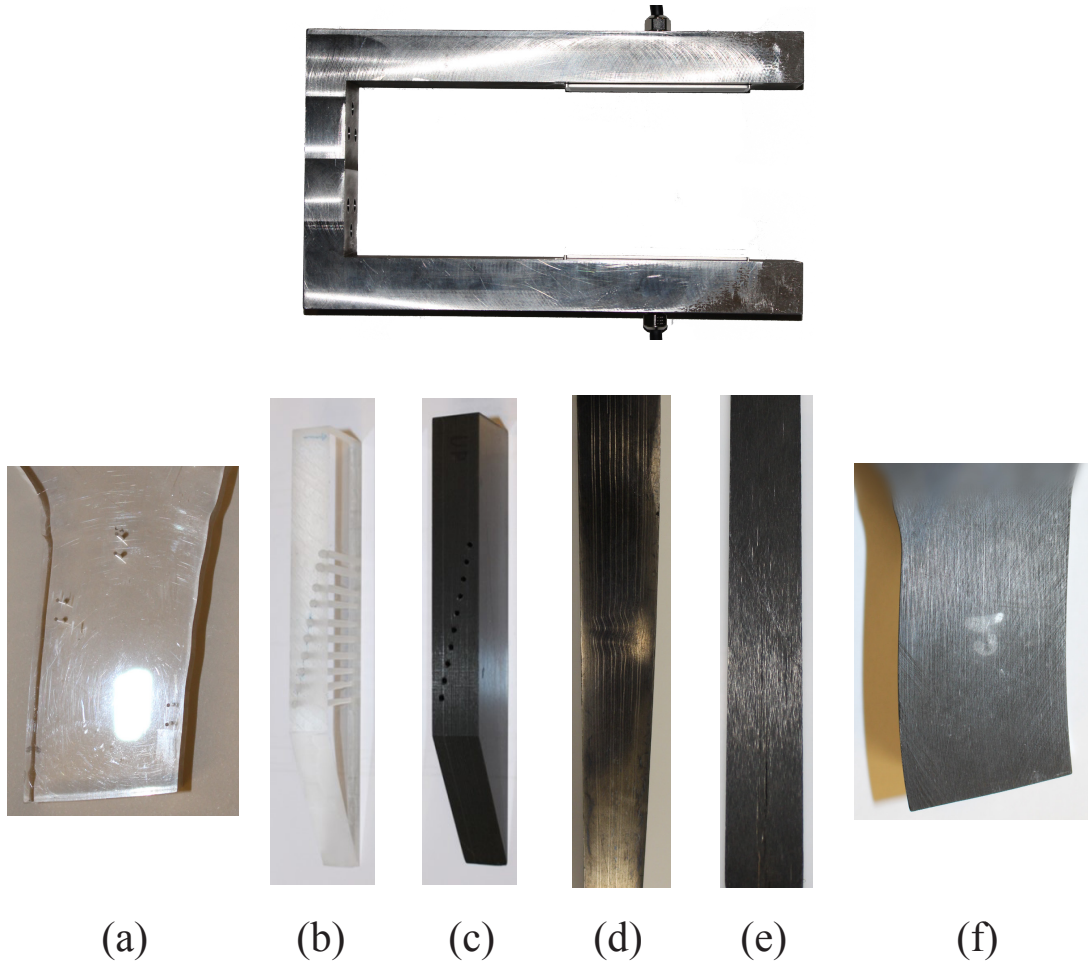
Top: stainless steel yoke used to hold two linear arrays for use in transmission and reflection. Bottom: samples used in experimental validation. (a) Plex1: Plexiglass sample machined to mimic fan blade dovetail section geometry. Includes 0.5 mm SDH. (b) Plex2: Flat Plexiglas specimen with 1.5 mm SDH. (c) Pmc1: Flat PMC coupon with 1.5 mm SDH; has very similar geometry to Plex2. (d) Pmc2: Nearly flat PMC coupon with waviness defect. (e) Pmc3: Flat PMC coupon with porosity damage. (e) Pmc4: Sample cut out of a representative PMC fan blade.
